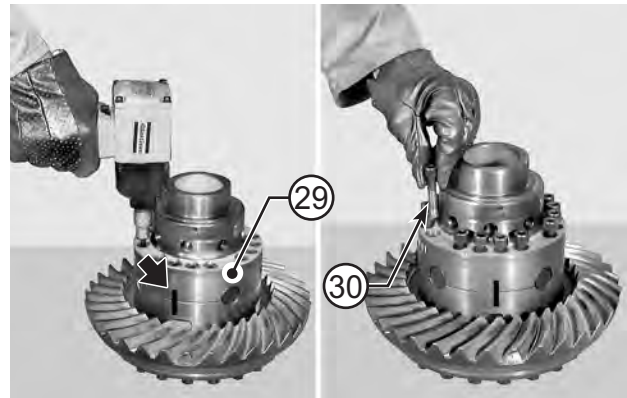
Make positional marks on the half-boxes of differential (29); loosen and remove joining screws (30).
